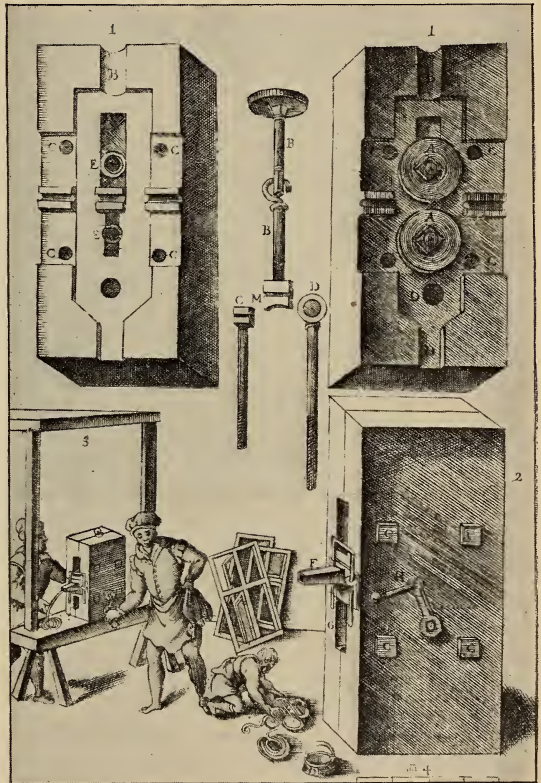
ZONCA'S METAL-ROLLING MACHINE, 1656
